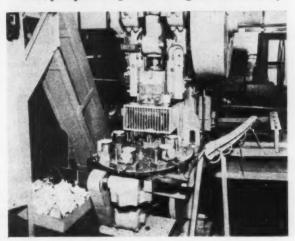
Six station dial fixture on press for trimming flash from castings. Parts are taken from bin at left and placed in indexing fixture.
